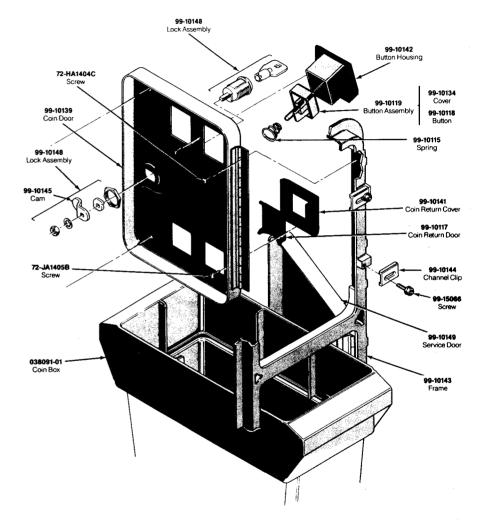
Coinco Coin Door Assembly, continued 171027-001 A
